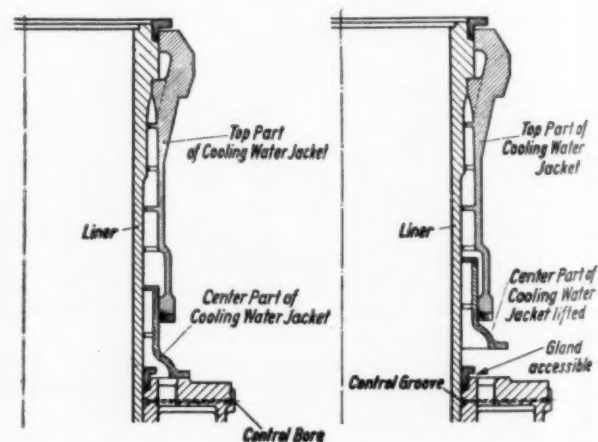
ACCESSIBILITY OF LINER GLANDS, A.E.G.-HESSELMAN DIESEL ENGINE
